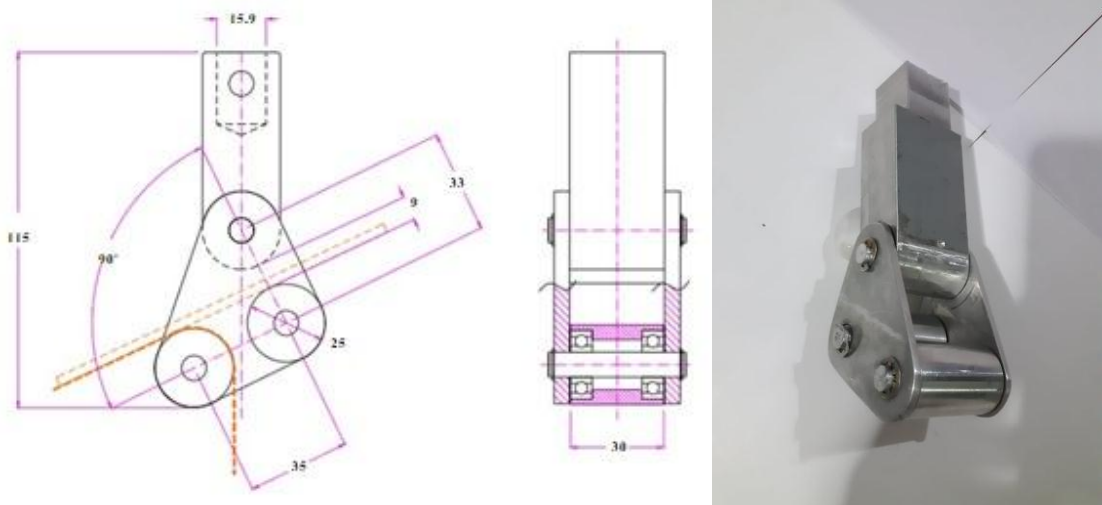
Prepared floating roller peel test fixture as per the D 3147 standard dimensions
